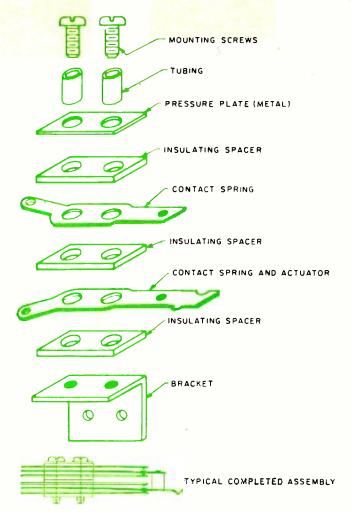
An exploded view of simple stack assembly is shown here along with a more complex completed stack switch unit.
